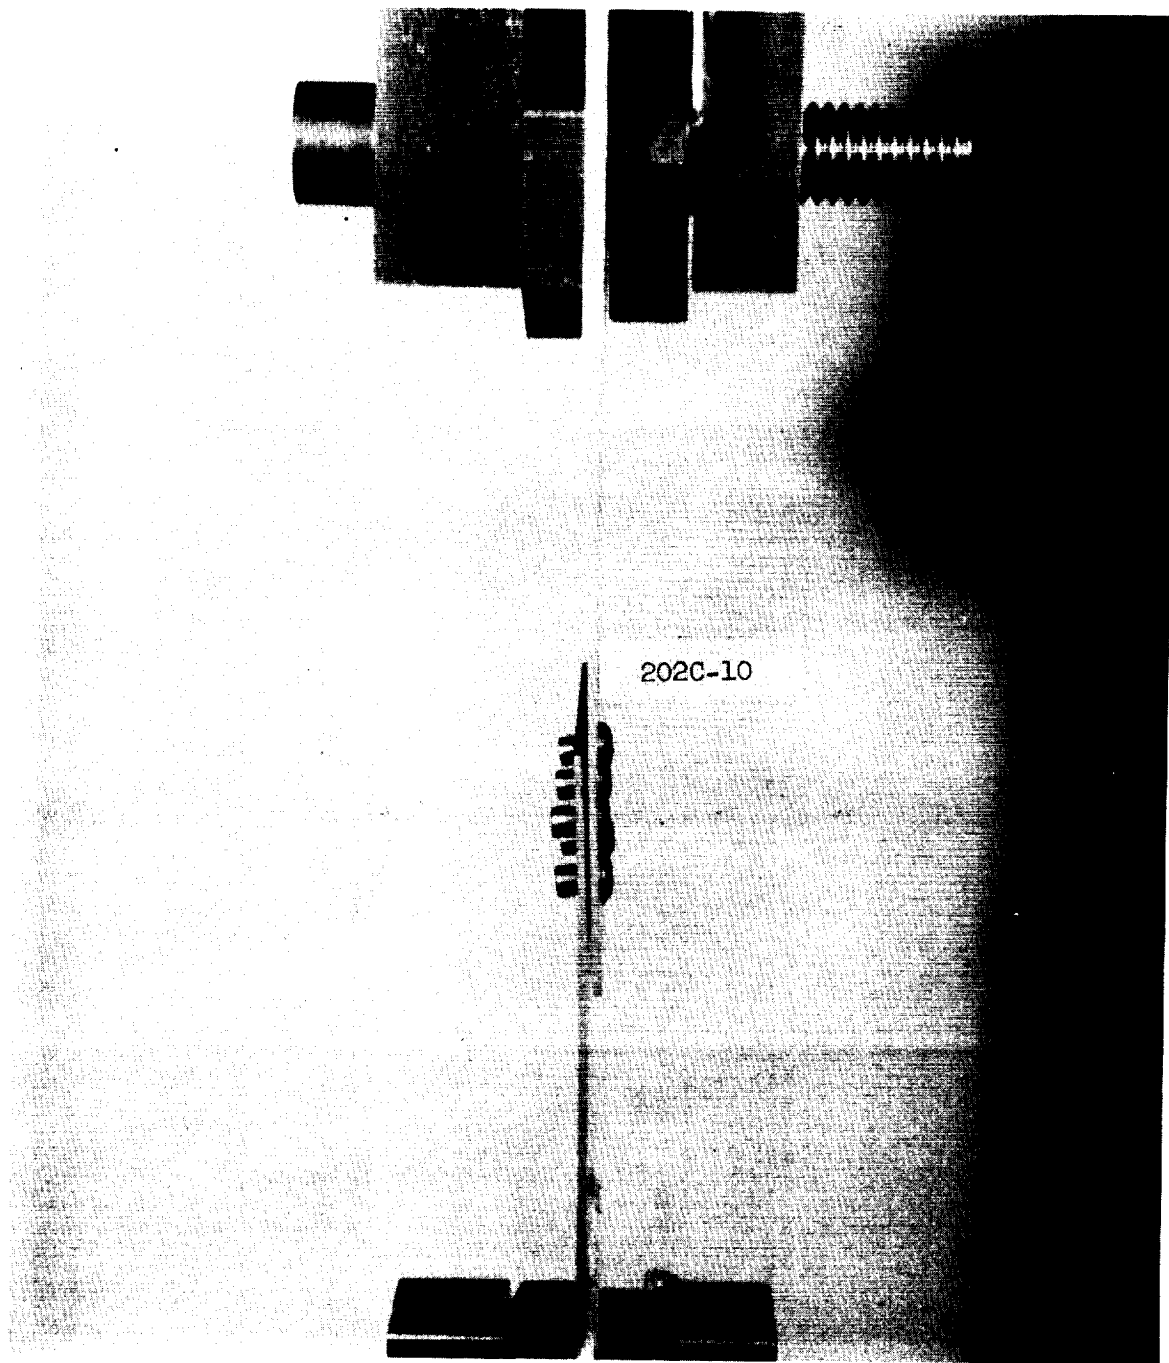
TYPE IIC SPECIMENS - 0.060-INCH MATERIAL - CHERRY BLIND RIVETS
